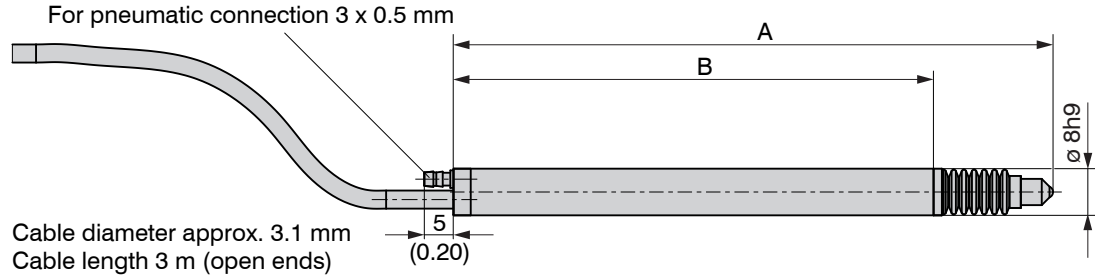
Housing dimensions for gauge DTA-xG8-3-CA-V
